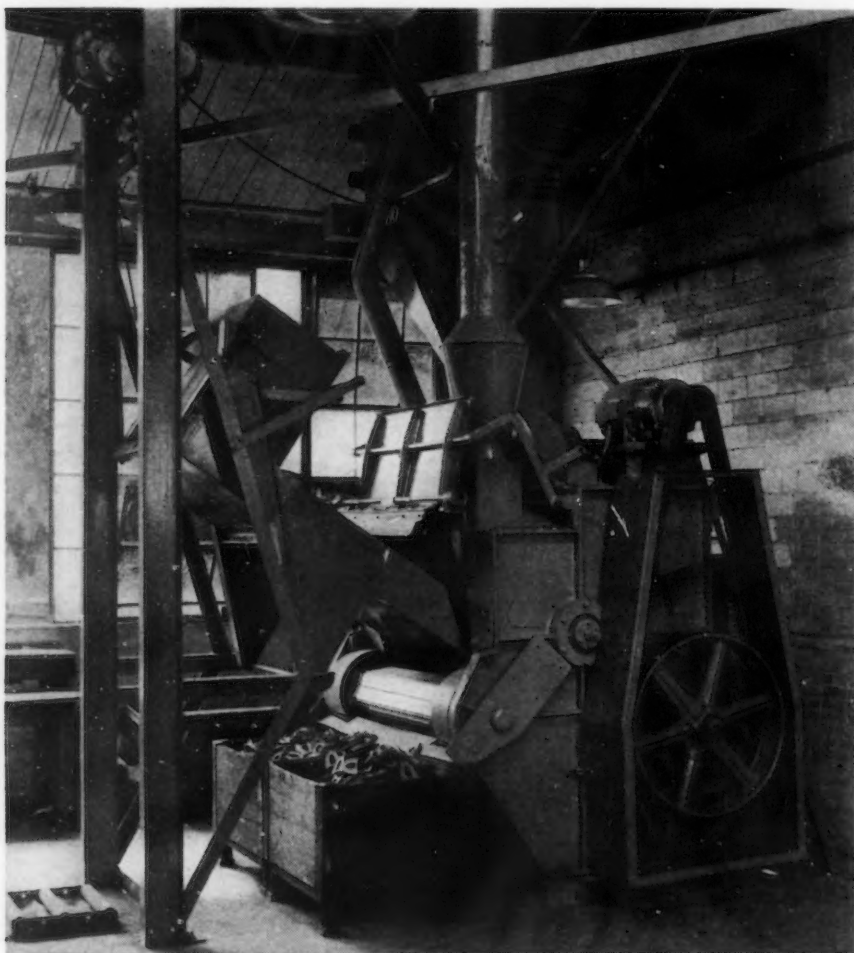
Close-up of cleaning machine. In this view, the loading mechanism is discharging the contents of a tilted tote box into the machine.
